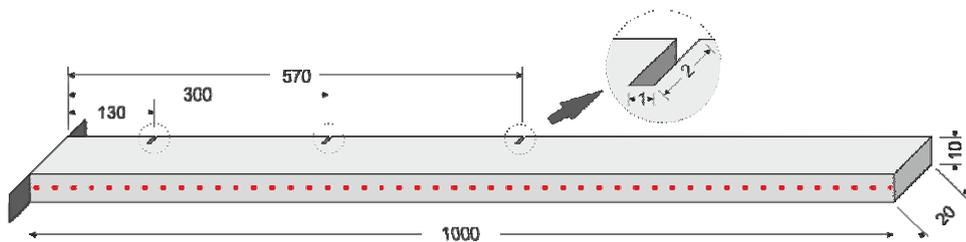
Dimensions in millimeters of test specimen with three cracks
